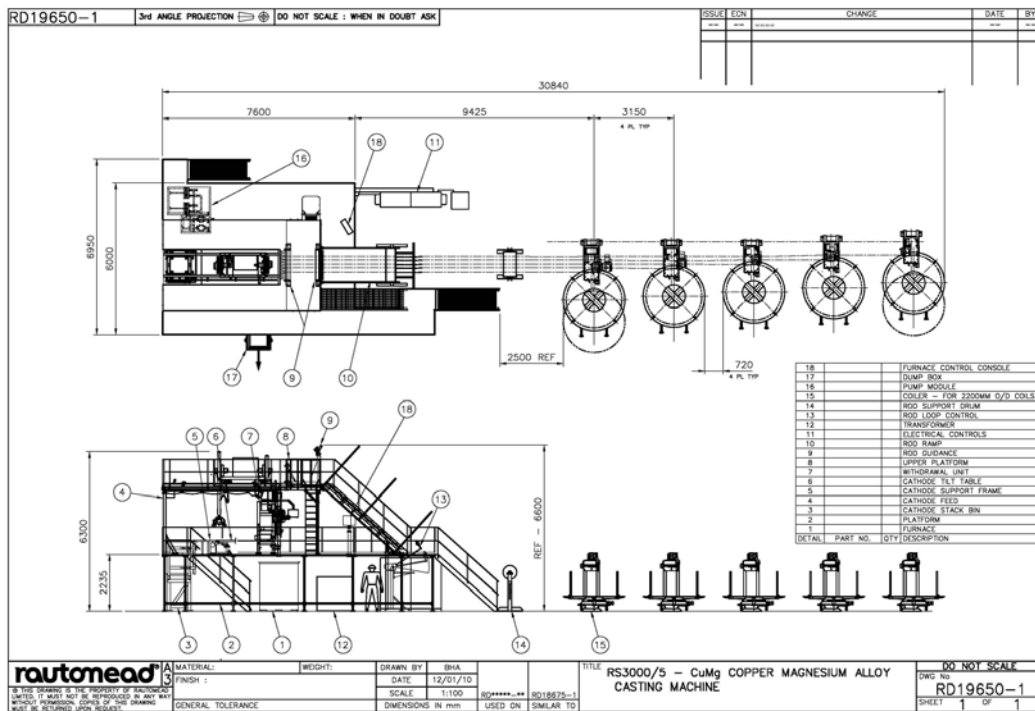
Rautomead RS 3000/5-Cu-Mg Casting Machine Layout
